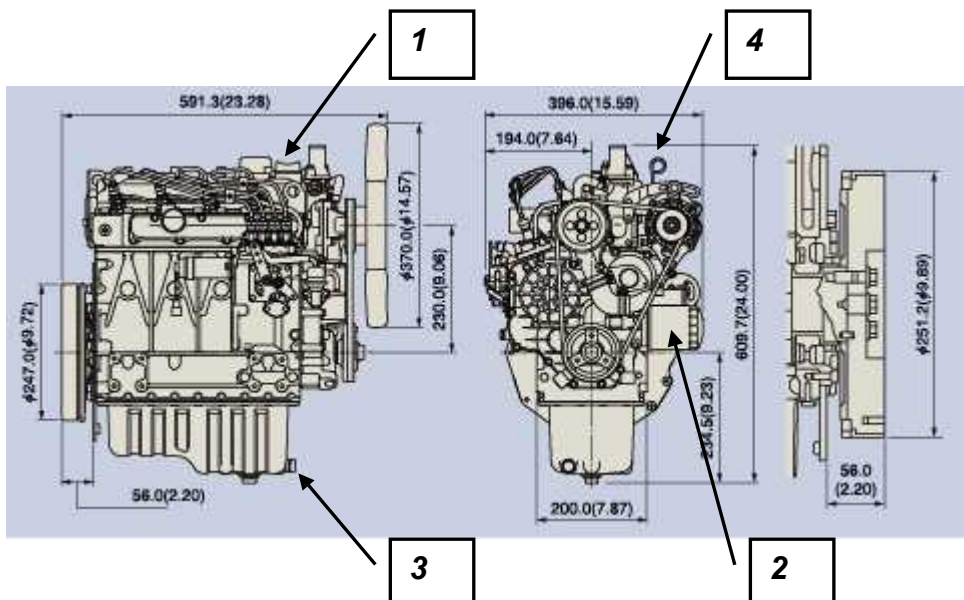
Changing oil and oil filter of Kubota D905-E motor
